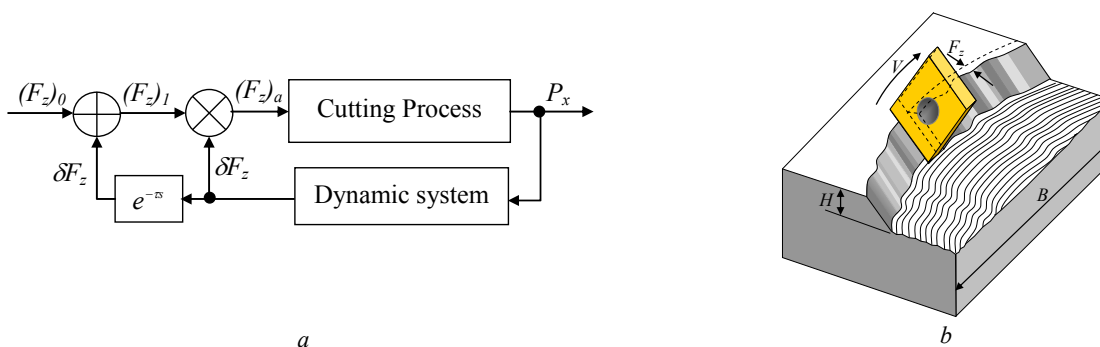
Face milling process: a - functional diagram, b - machining “on the trail”
